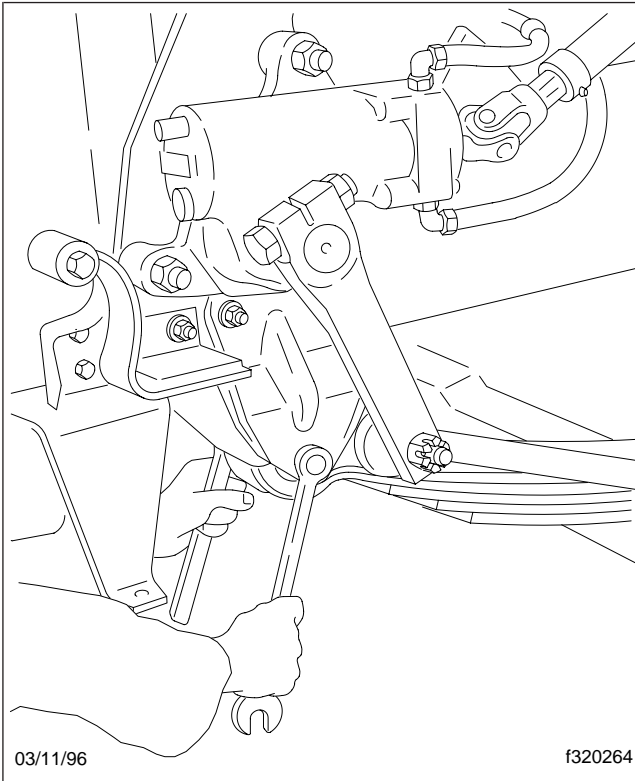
, Forward Spring Eye Bolt Removal/Installation (typical)
